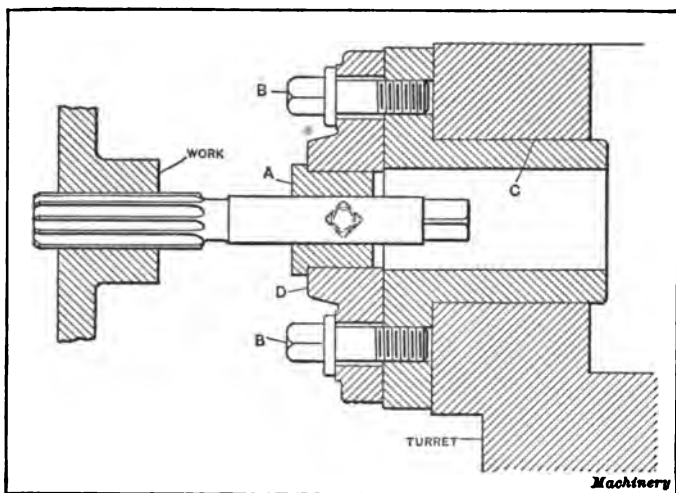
Reamer Holder with Means of Adjusting It to Spindle Alignment
